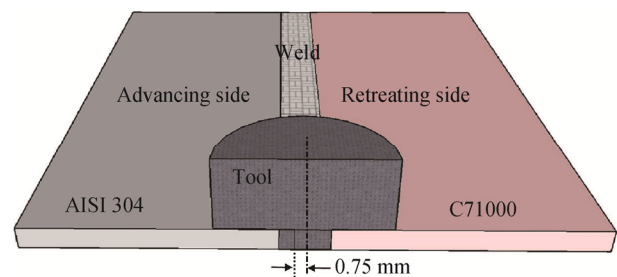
Schematic illustration of friction stir butt welding.
